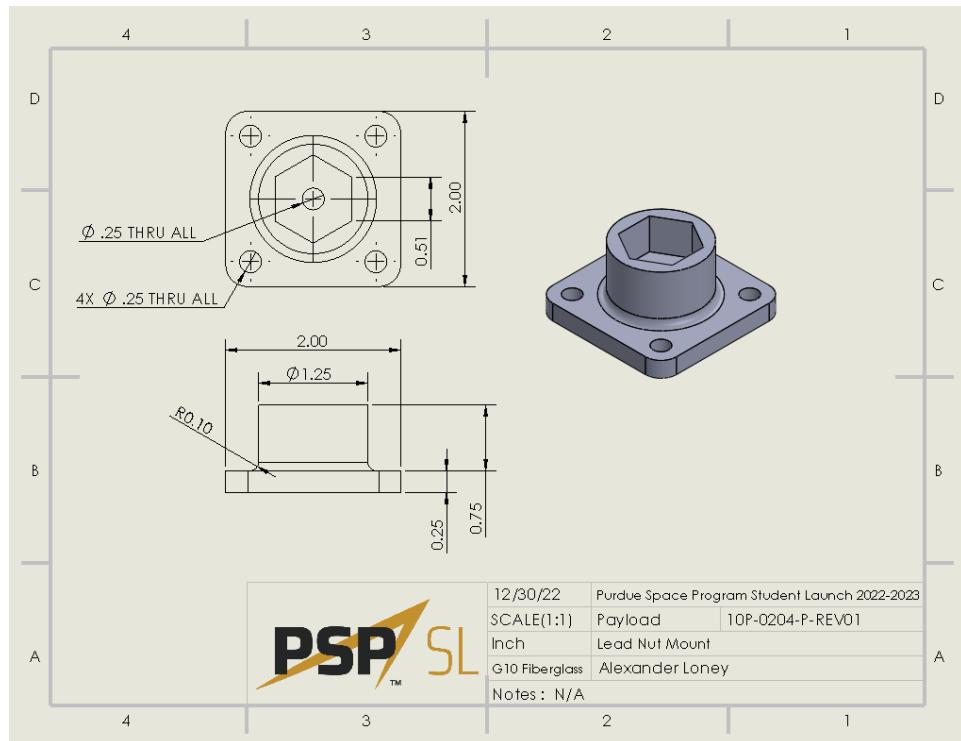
R&D Lead Nut Mount Technical Drawing
